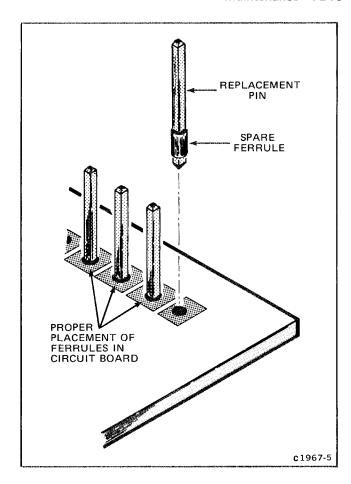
Exploded view of circuit-board pin and ferrule.
